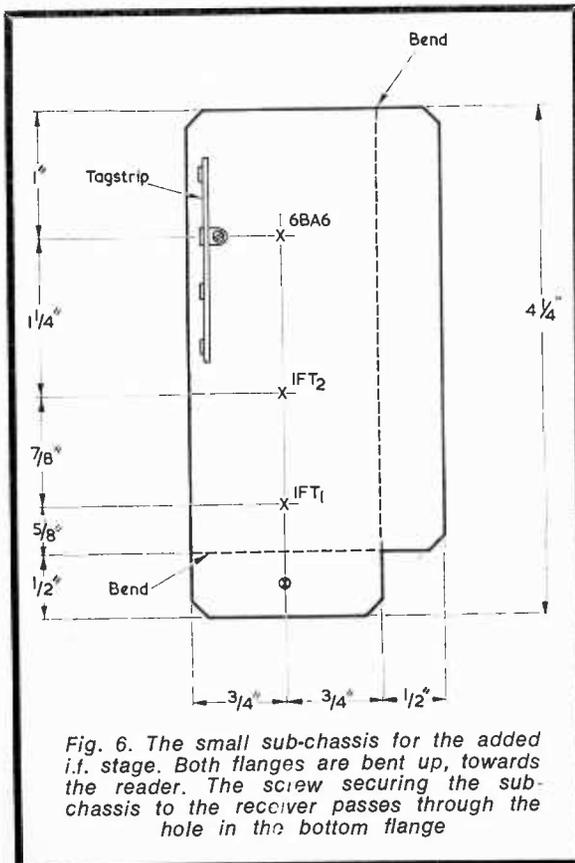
The small sub-chassis for the added i.f. stage. Both flanges are bent up, towards the reader. The screw securing the sub-chassis to the receiver passes through the hole in the bottom flange
